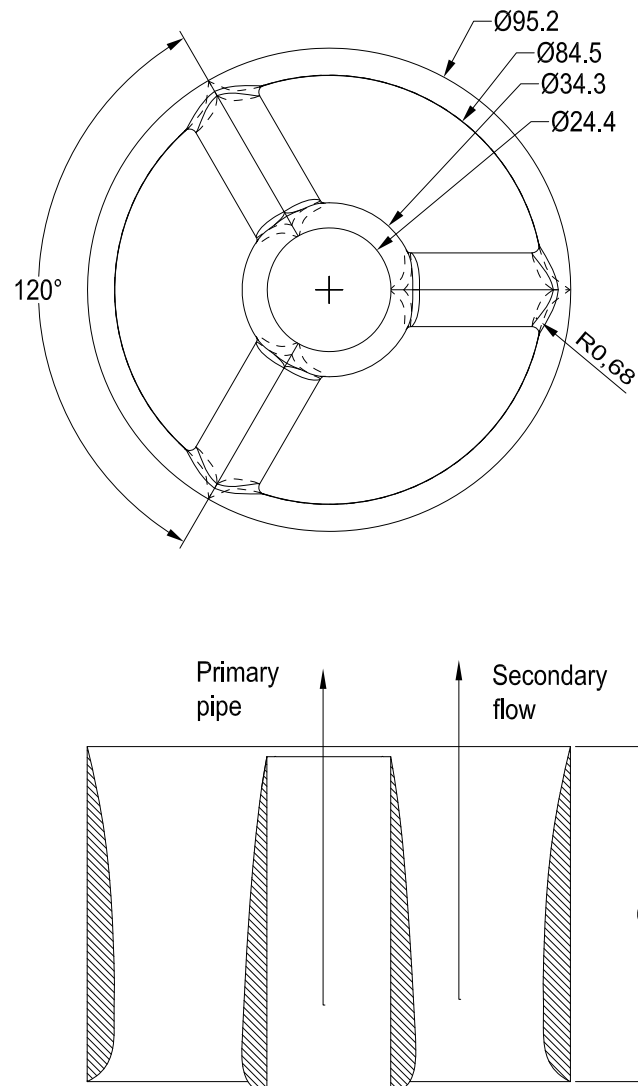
Profile of the hub with integral spokes with overall dimensions, all dimensions in mm.
